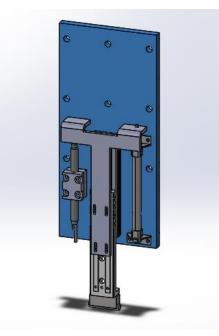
CAD MODEL OF MAIN BEARING RUNOUT ASSEMBLY
